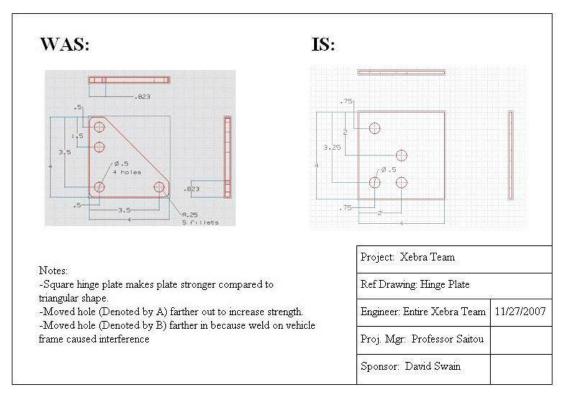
Engineering Change Notice (ECN) showing the before and after CAD drawings of the steel plate to hold the tubing to the vehicle frame to raise the truck bed
